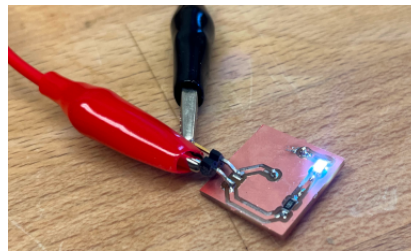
A Simple Two-Sided Printed Circuit Board Milled with Tandem Using a Modified Notebook.
